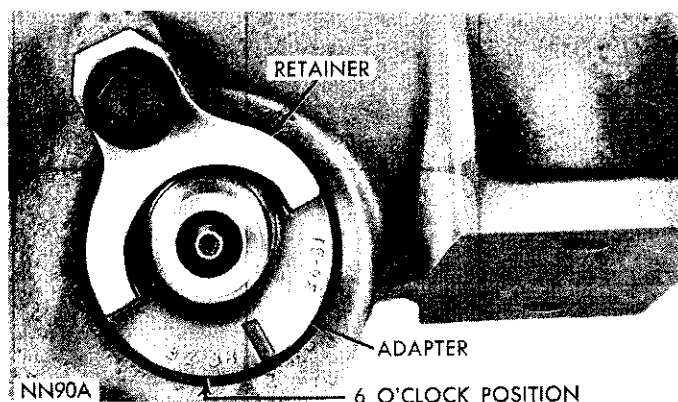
Speedometer Pinion and Adapter—Installed in Extension Housing
